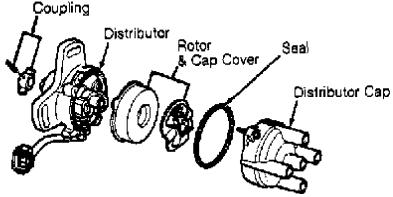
Exploded View of Distributor (MX-6 & 626 Turbo) Courtesy of Mazda Motors Corp.
